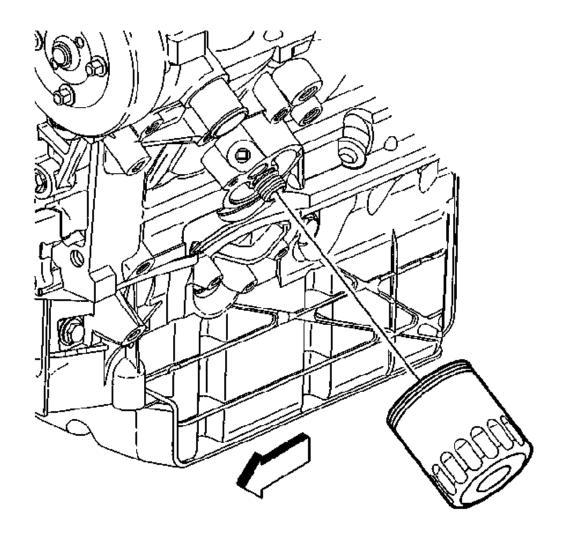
Removing/Installing Oil Filter Courtesy of GENERAL MOTORS CORP.
